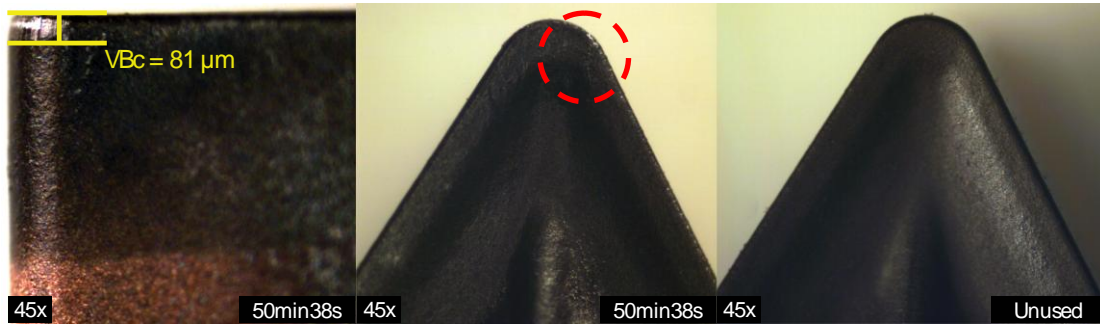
Flank during cutting (left) and rake surface (middle and right) during and prior to cutting of IC8250 tool.
